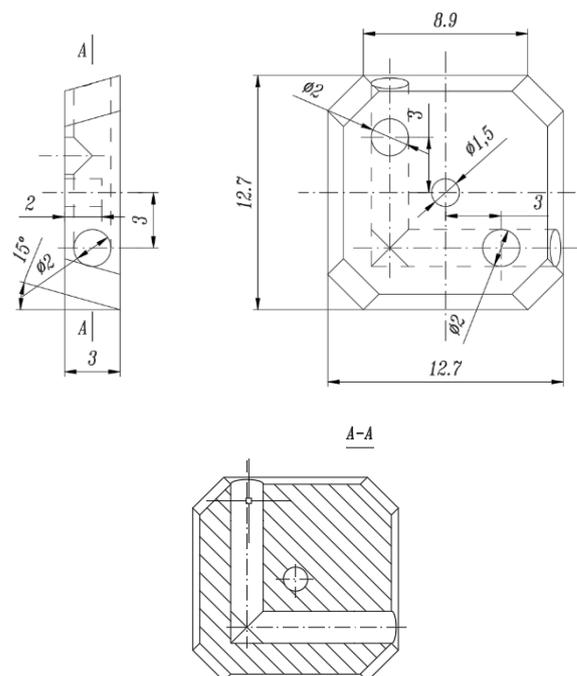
Solution C - Insert with internal L-shaped cooling channel
